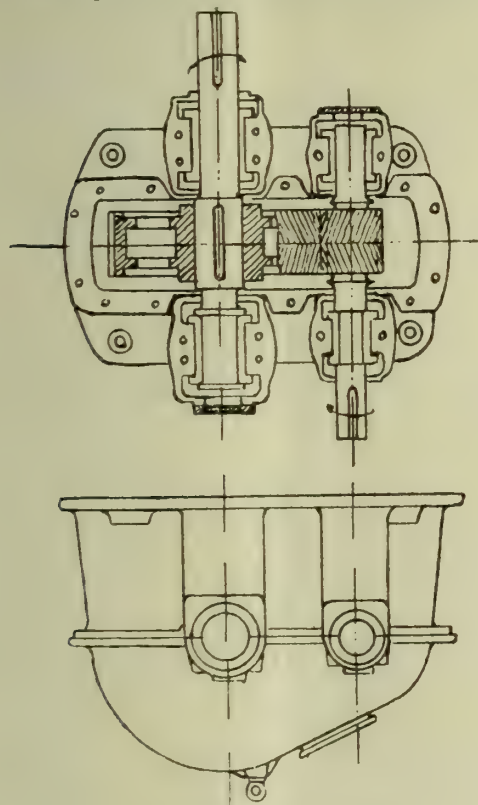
LIGHT SINGLE REDUCING GEAR.
